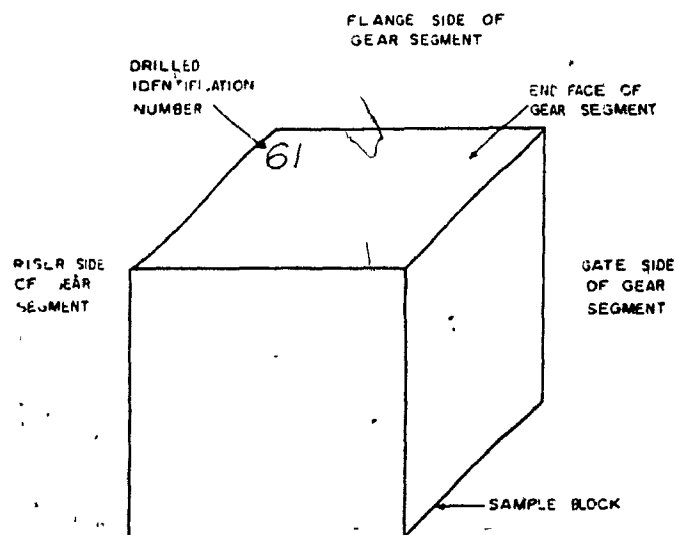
Location of the steel sample blocks removed from the gear end.
